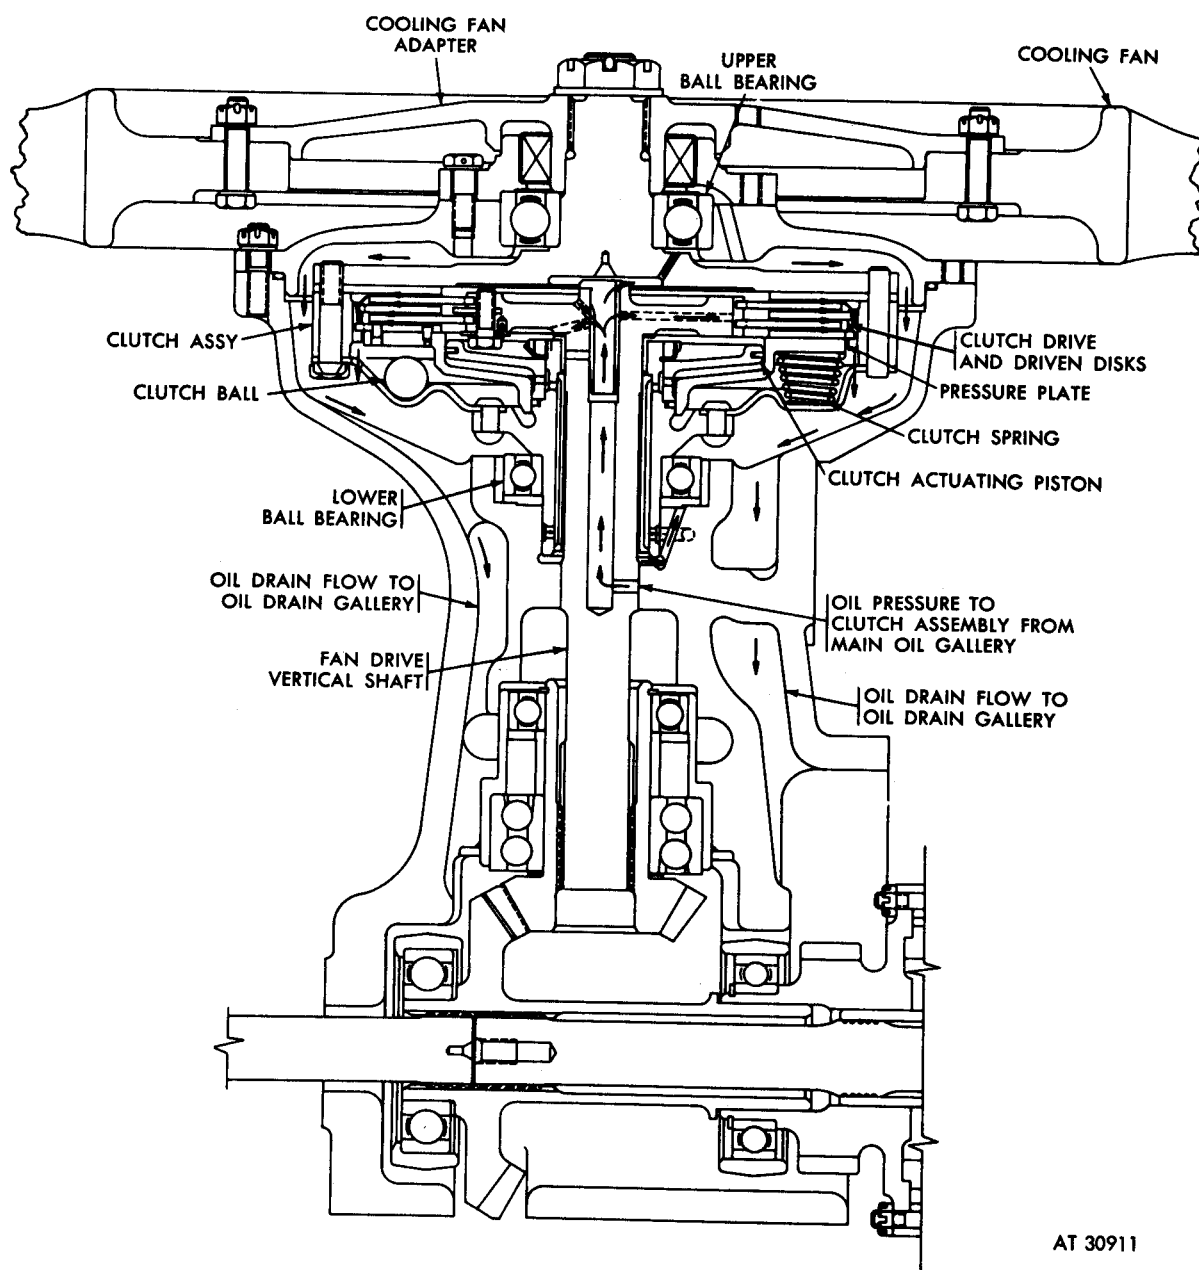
Piston actuated cooling fan clutch—sectional view.
